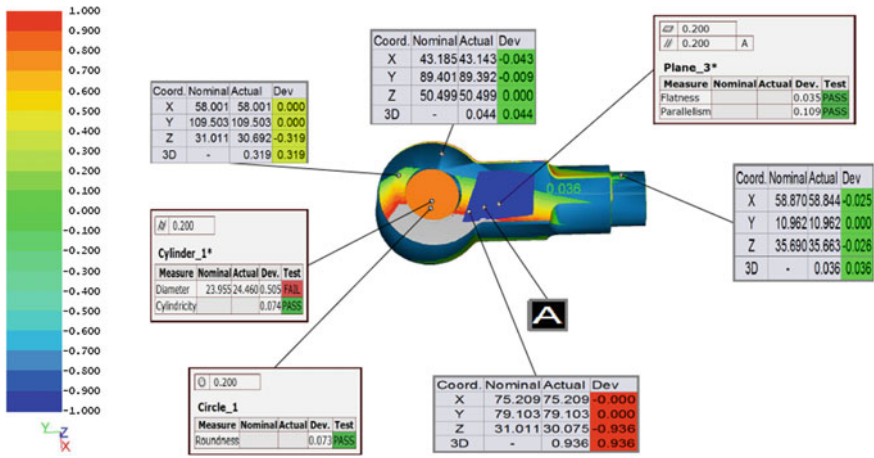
GD&T inspection (automatic pre-alignment)
